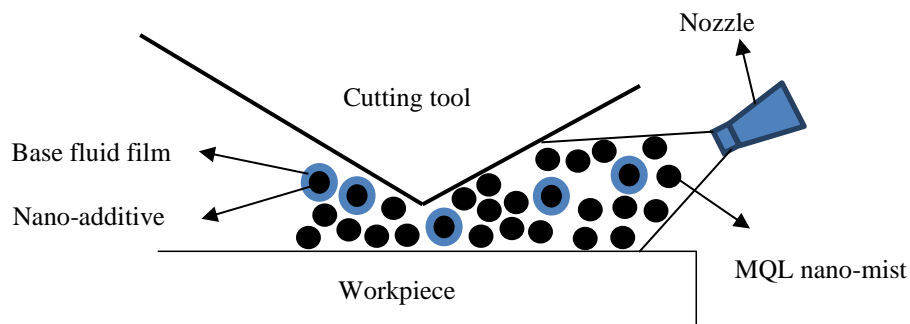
Schematic of the rolling MQL-nano cutting fluid mechanism
